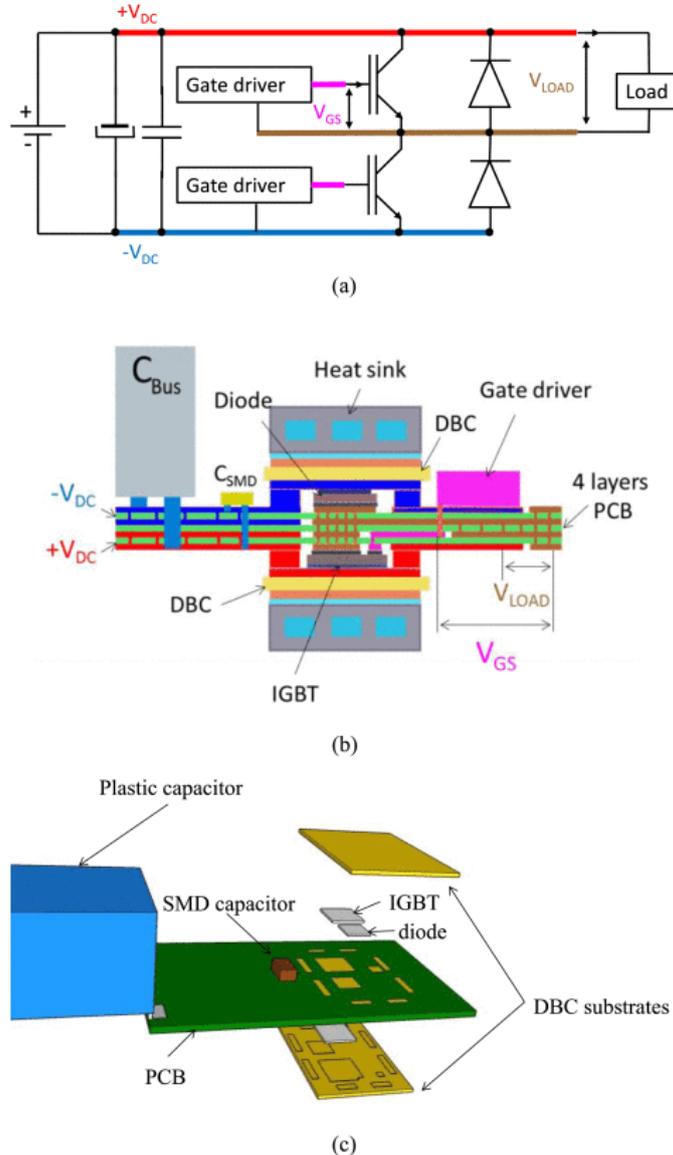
A chip-on-chip packaging technology for IGBT power module [32].
